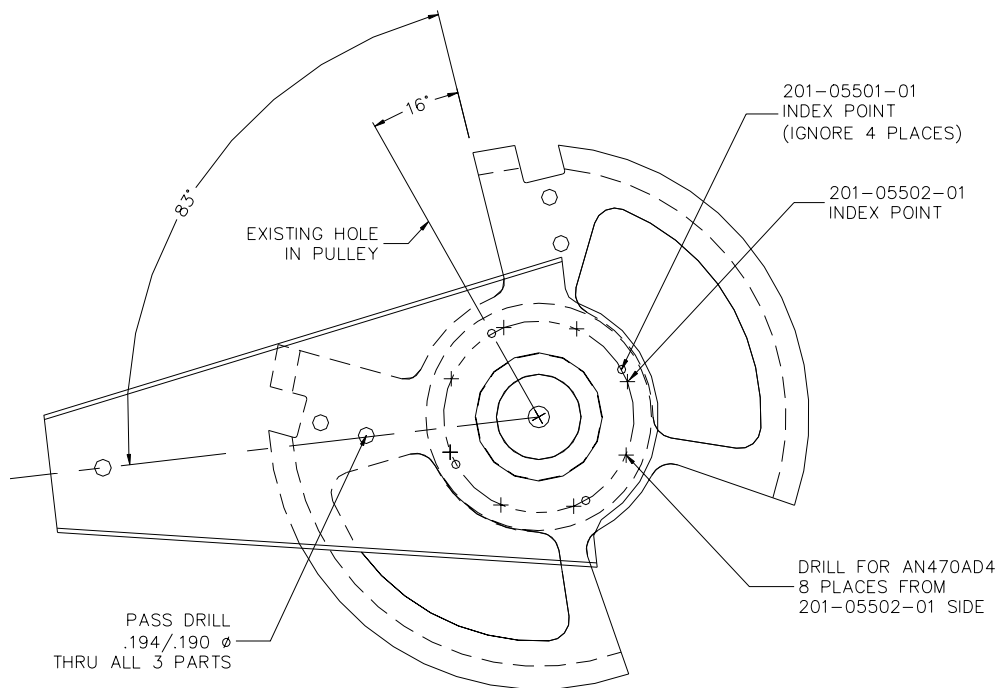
Positioning and Drilling the Left Hand Bellcrank Assembly
